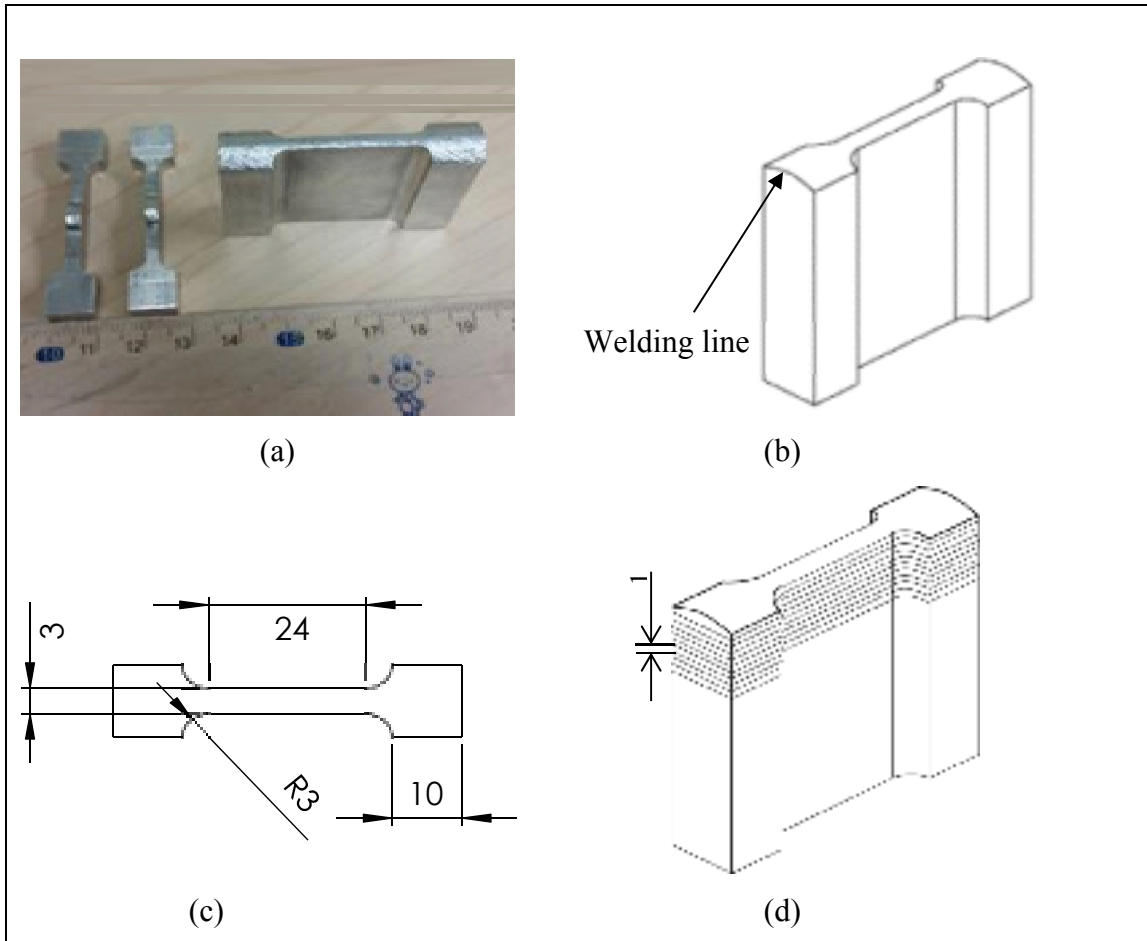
HAZ extracted micro-tensile specimens parallel to welding line, dimensions in mm, a) and b) machined specimen, c) and d) the extracted DIC samples
